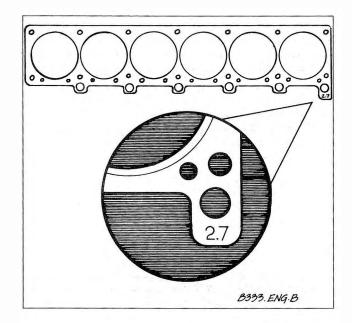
Engine displacement code stamp on cylinder head gasket flange.
